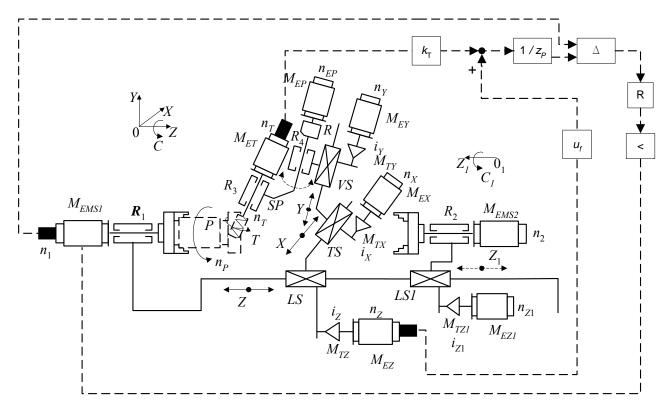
Kinematic structure of a CNC revolver lathe. with mixed association kinematic chains for cylindrical gear tooth processing:
